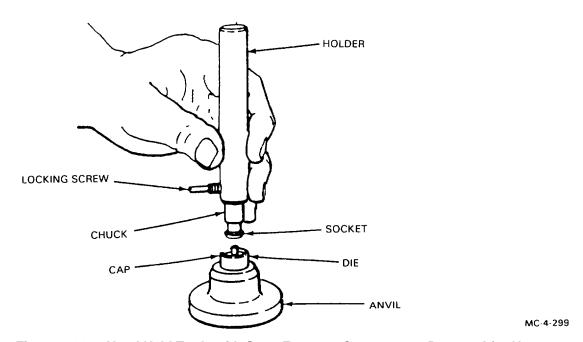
Hand Held Tools with Snap Fastener Components Prepared for Use.
